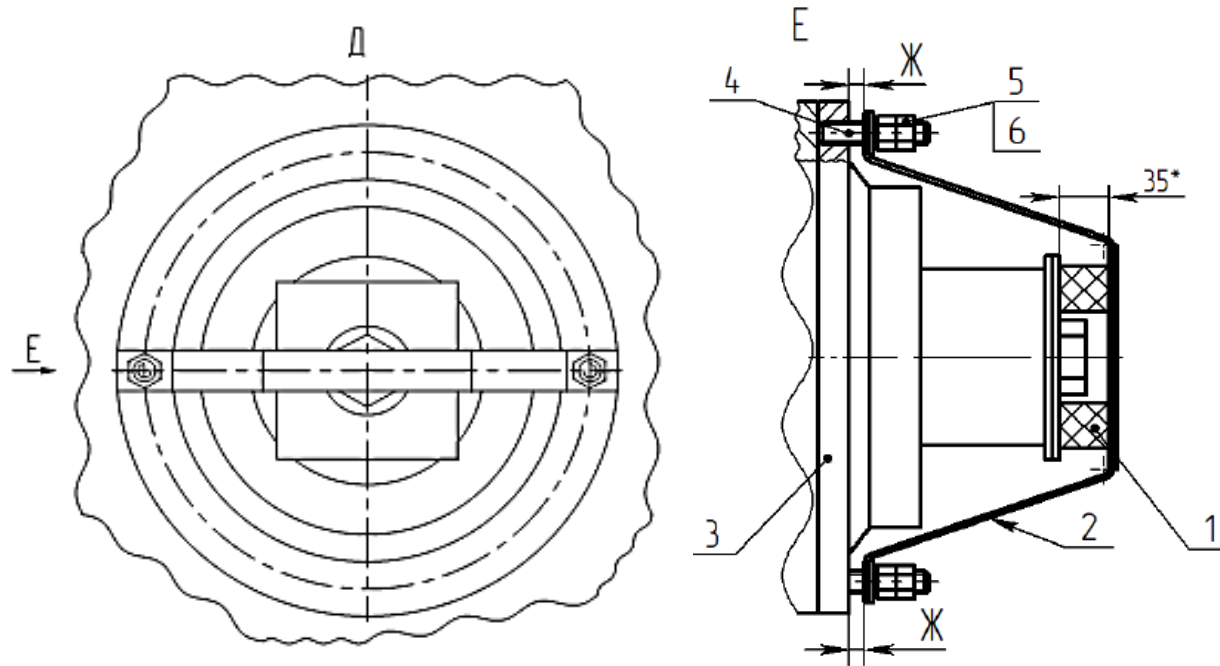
Fixing Shaft End of the EDP-600 Traction Electric Motor During Transportation
